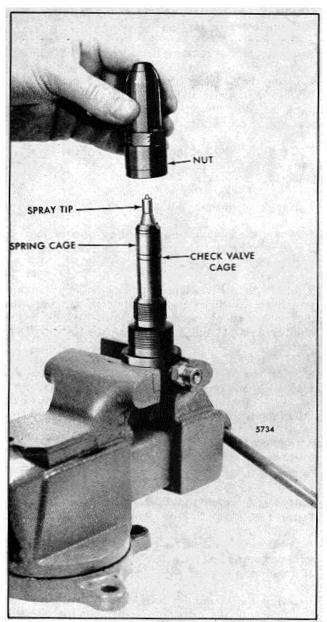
Assembling Injector Valve Parts on Tip Tester Adaptor J 23010-129
